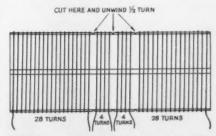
This drawing shows how to make the coil assembly. Not shown are the taps needed for changing bands. The tap points listed below all are counted from the outside ends of the coil.
